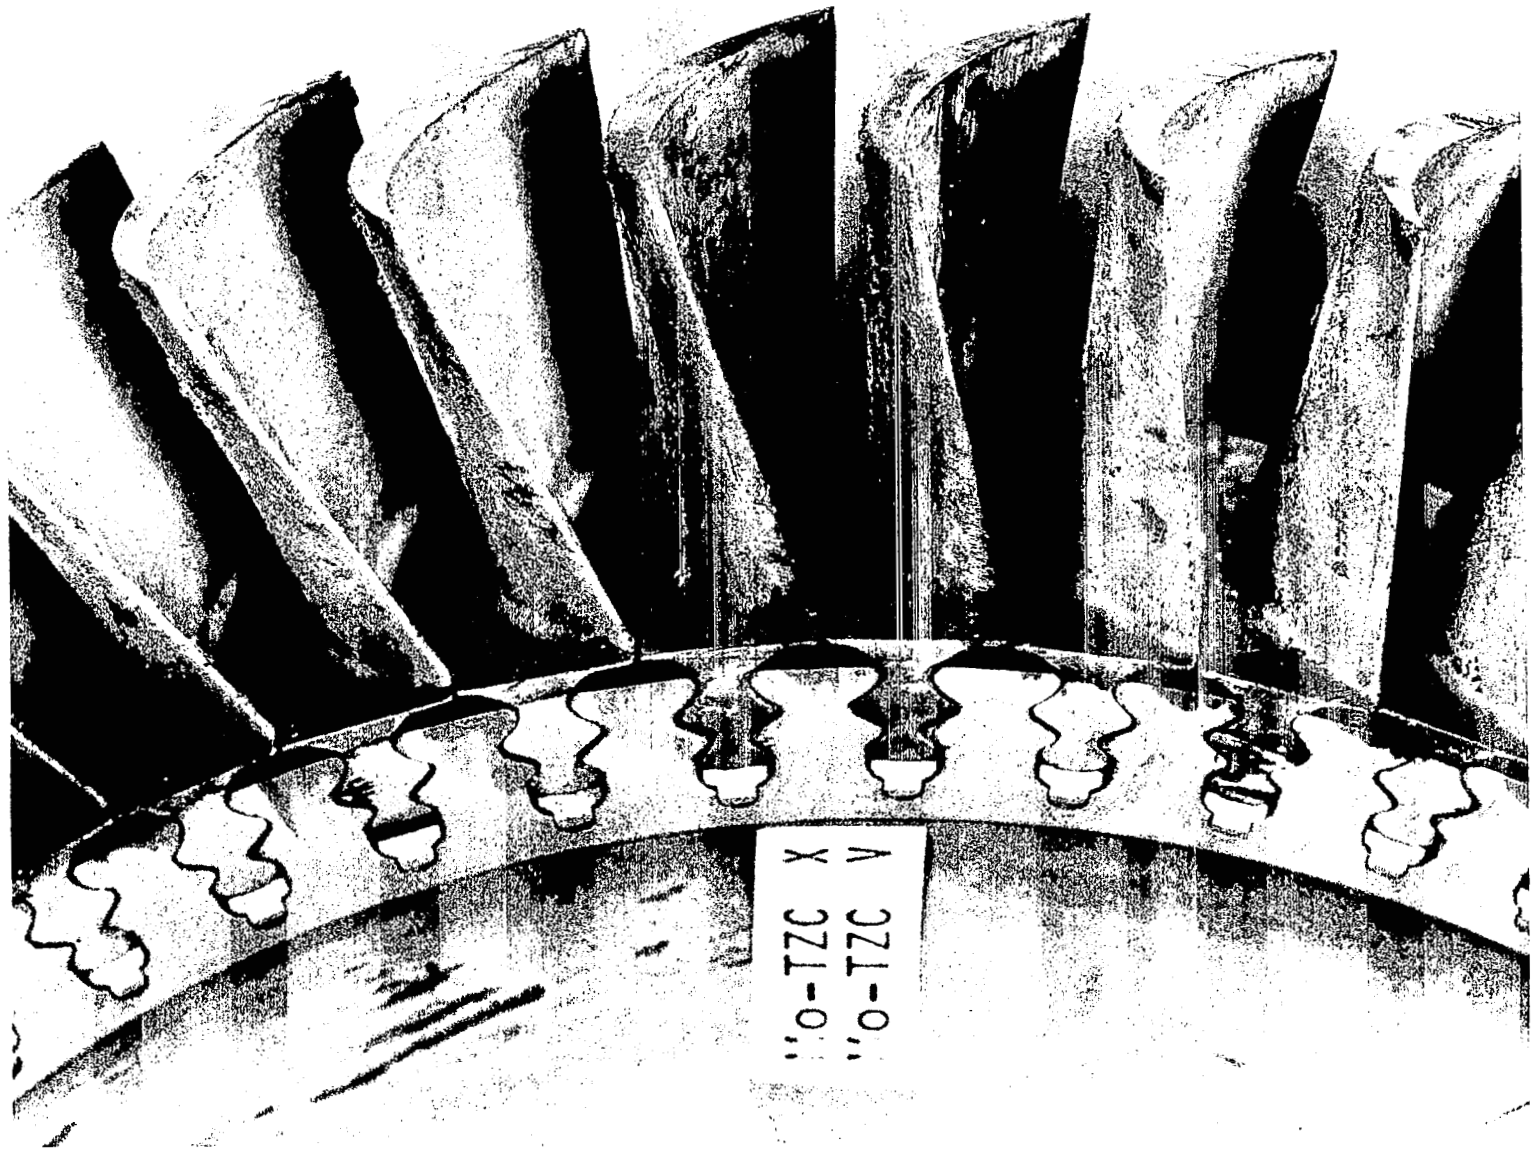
Forward Surface of Stage 3 Rotor Bucket and Wheel After 5000 Hour Test. Mo-TZC Buckets X and V in Center. (P70-6-19AE)
